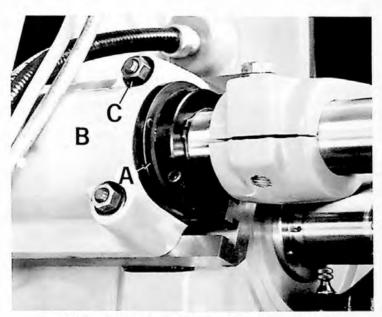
Mounting Bracket and Chasing Bar Assembly
